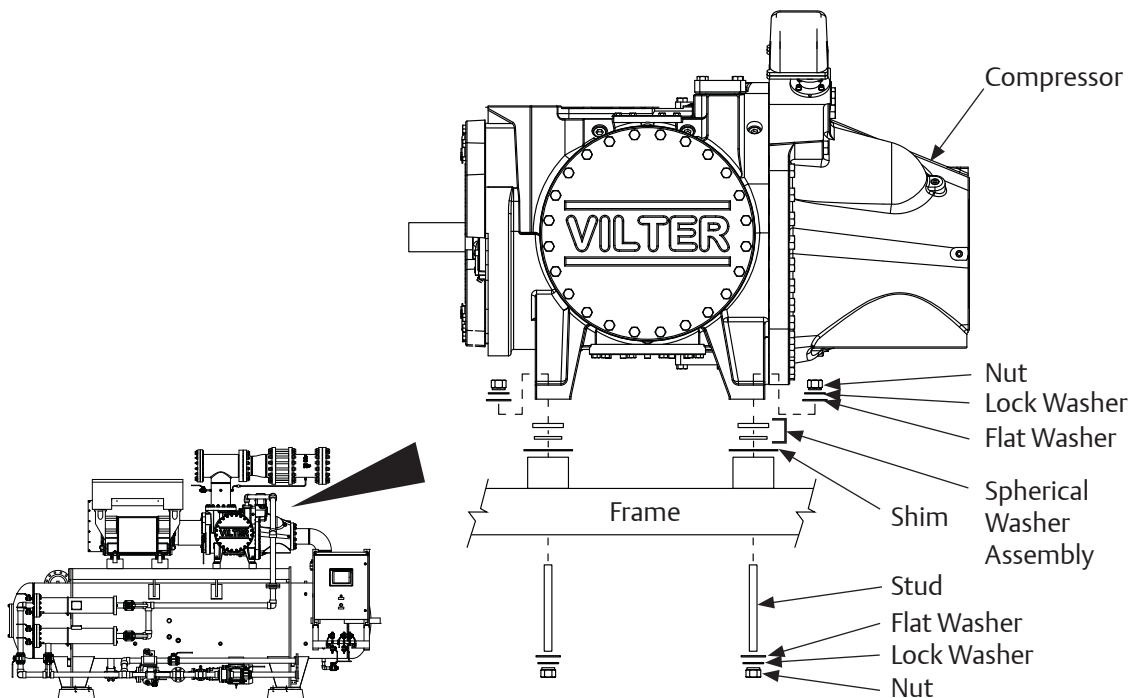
Compressor Replacement and Hardware Assembly (Models 2401-3001 Shown)
